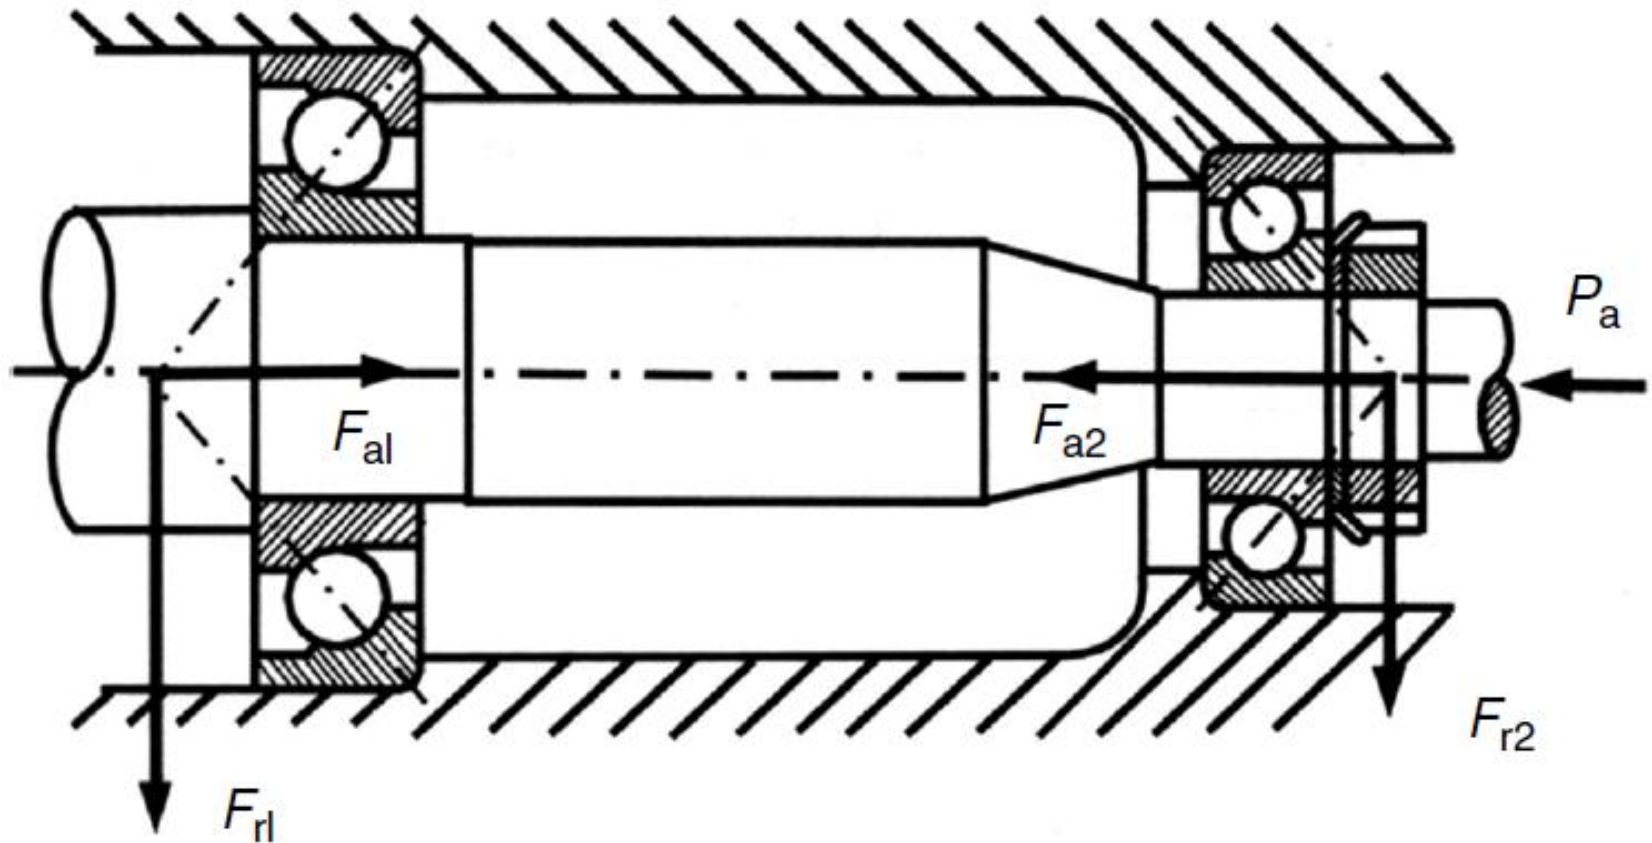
Rigid shaft mounted in back-to-back angular-contact ball bearings subjected to combined radial and thrust loadings.
